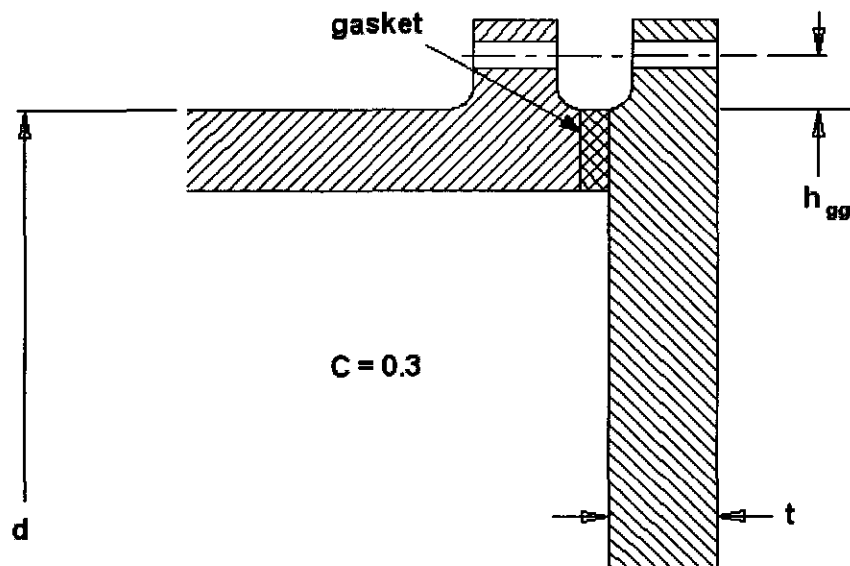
Flat head dimensions (Appendix 7: drawing VS_HEAD)
